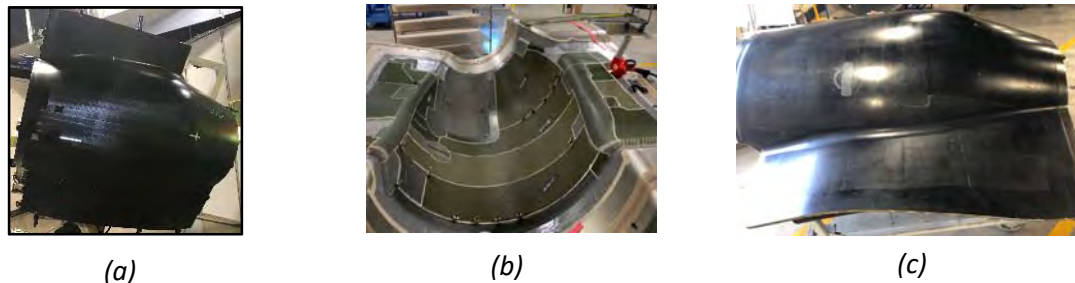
Fan Duct Inner Surface Liner Manufacturing: (a) Skin Perforation, (b) Bond Panel Assembly, (c) Final Acoustic Panel.
